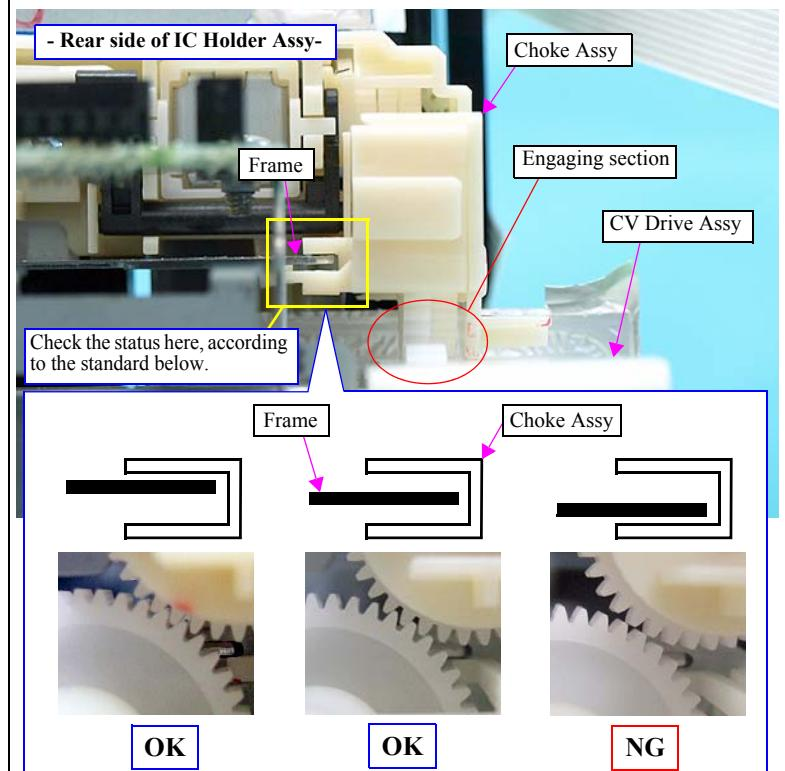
Check for Engagement of the CV Drive Assy and the Choke Assy
